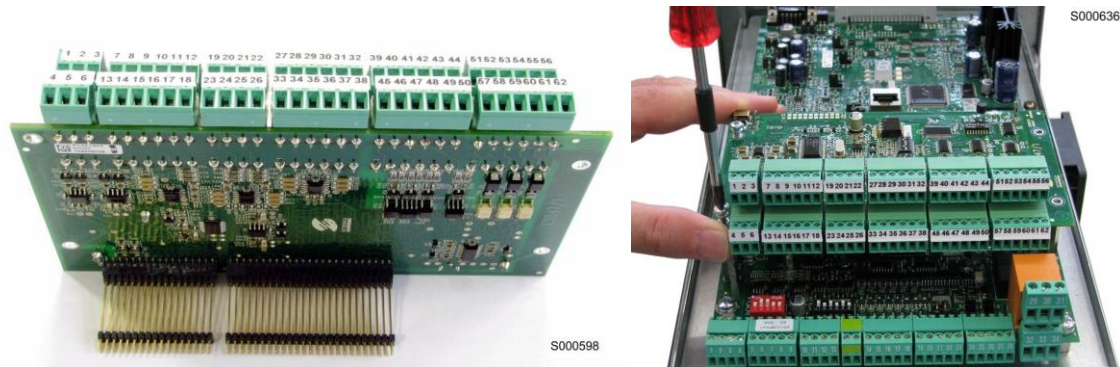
Fitting the strips inside ES847 board and fixing the board on slot C
